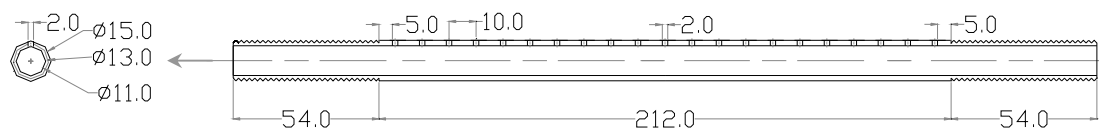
Detailed drawings of the test tube [dimension unit: mm].
